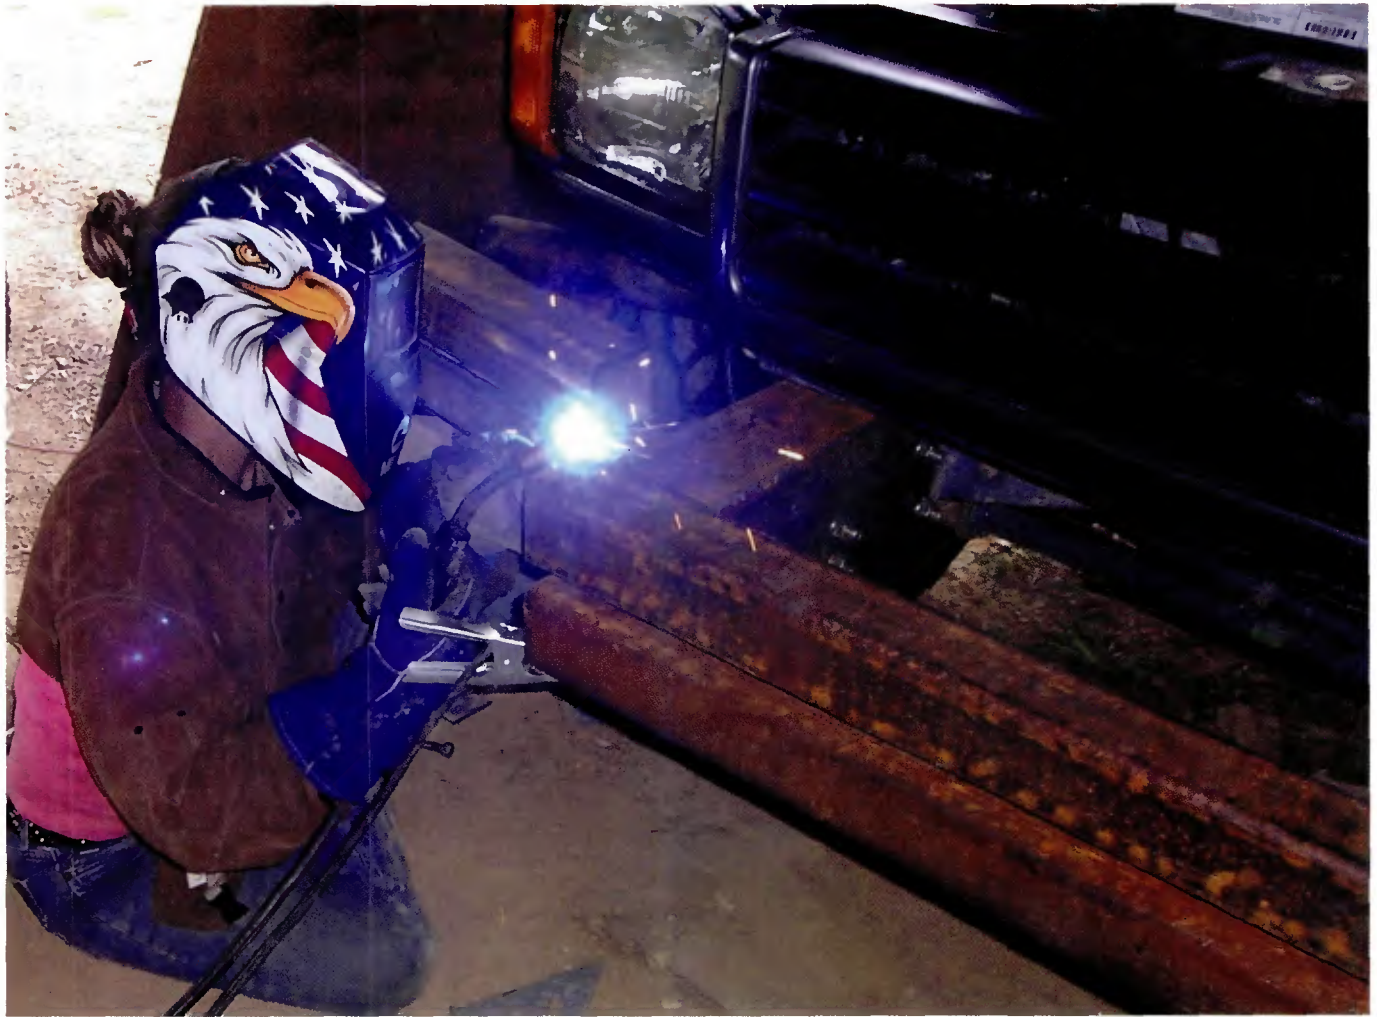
Greek is shown performing gas metal arc welding on a bumper for a Land Rover. “I like to be able to do any kind of job I’m confronted with,” she said.
